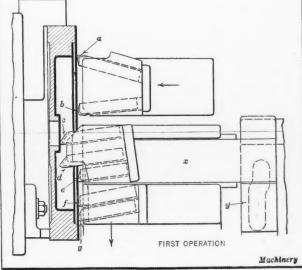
Tooling provided on Machine illustrated in Fig. 1
